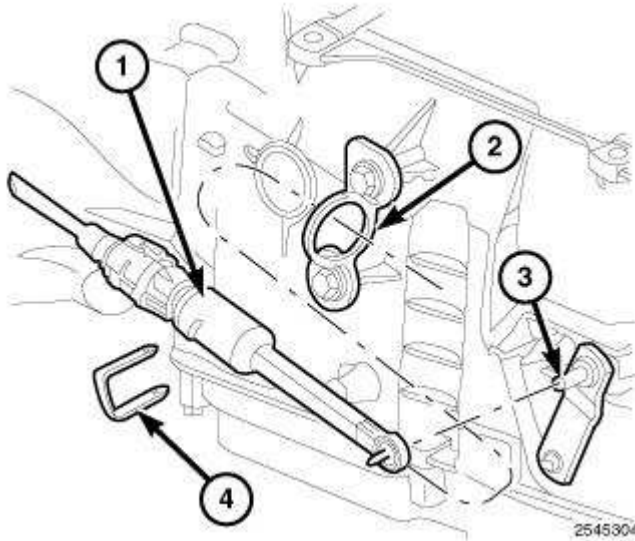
Identifying Gearshift Cable, Eyelet & Manual Shift Lever
